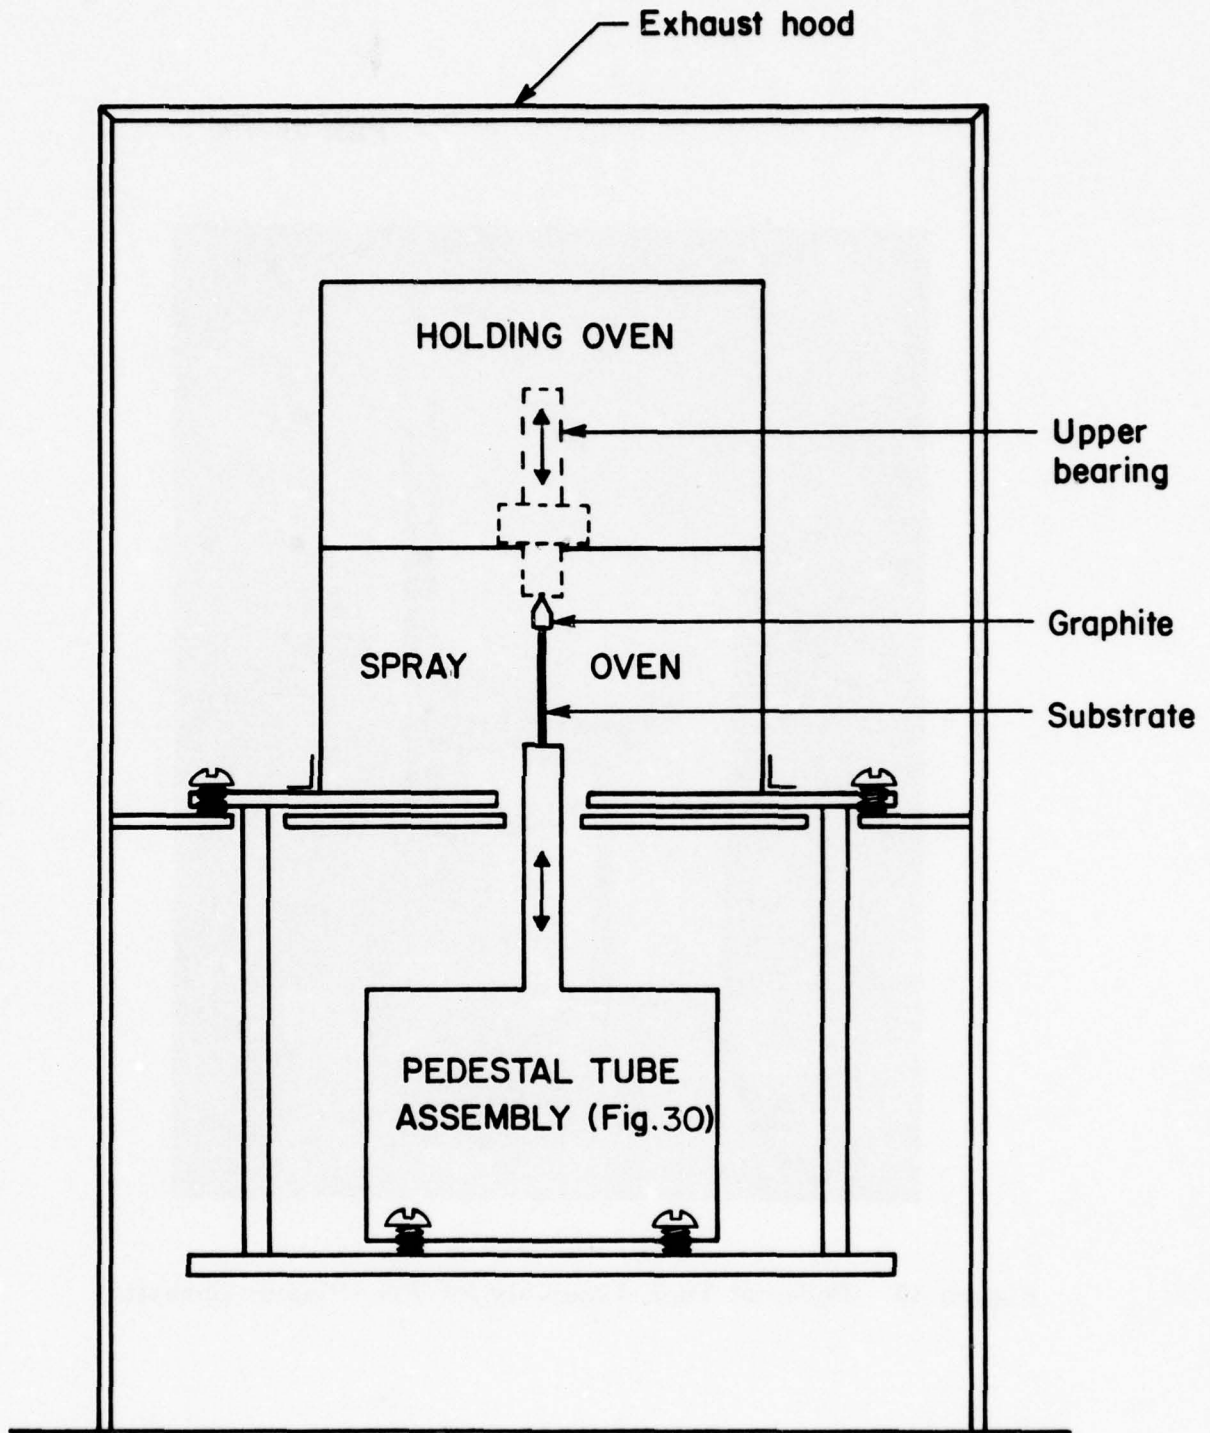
Diagram of Metal Supporting Plates and Interconnected Equipment.
